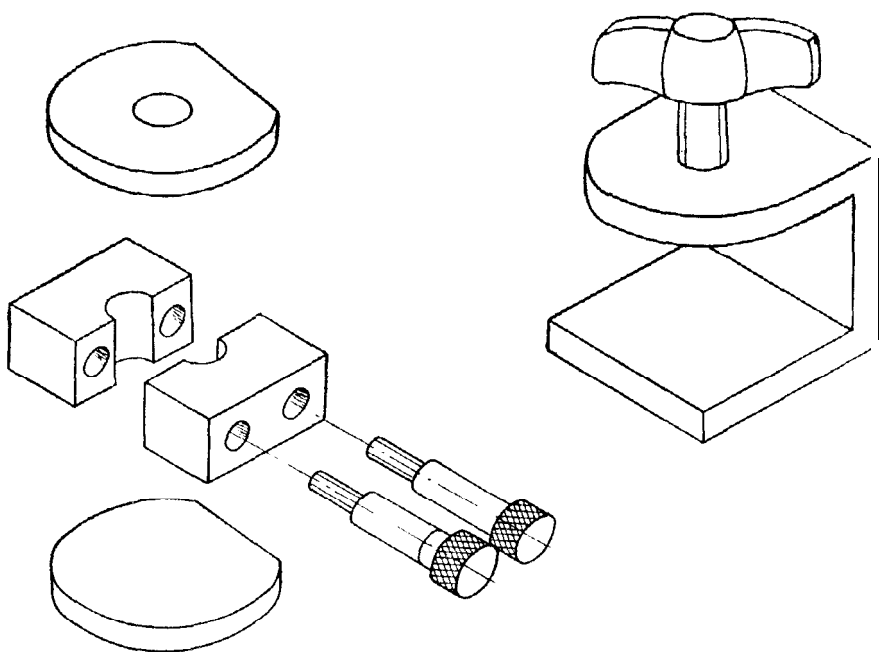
MOULD AND CLAMP FOR PREPARATION OF COMPRESSIVE STRENGTH TEST SPECIMENS
